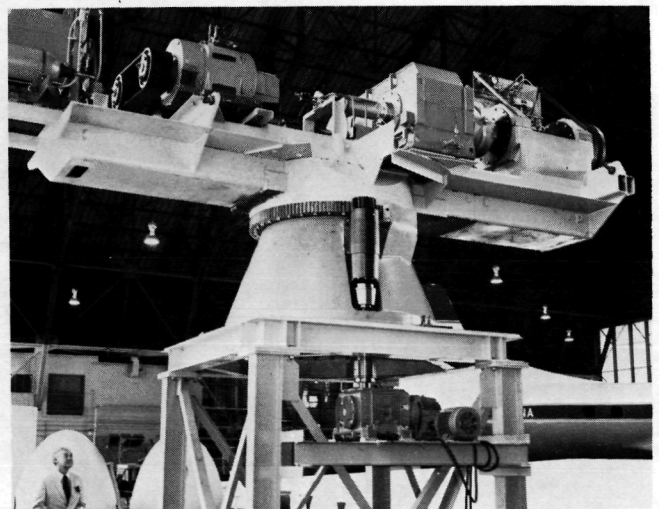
Test of drive train and yaw assembly at Lewis Research Center.
